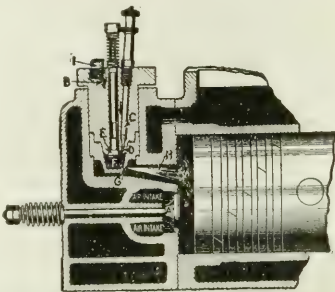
SECTION OF CYLINDER HEAD SHOWING IGNITION CUP WHICH AUTOMATICALLY FEEDS FUEL TO COMBUSTION CHAMBER.
